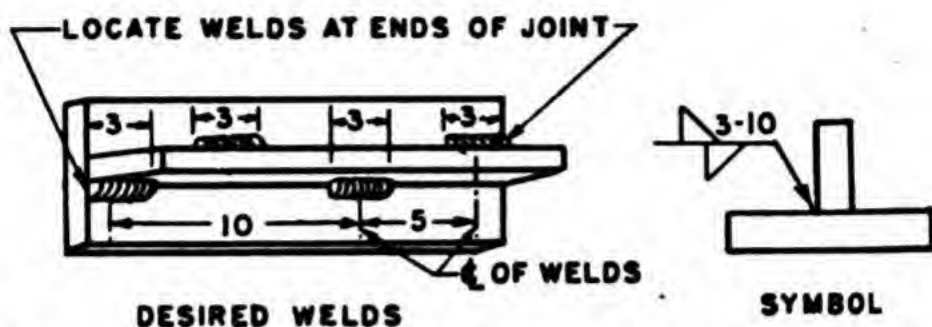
Length and pitch of increments of staggered intermittent welding.
